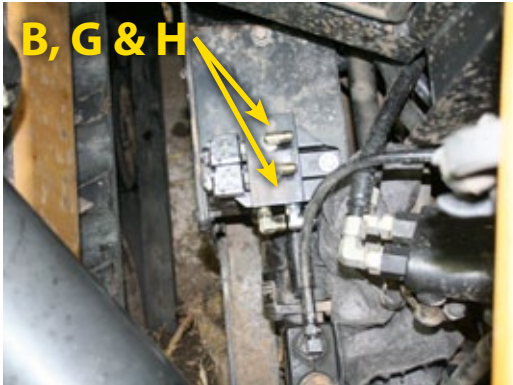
Install Mounting Bracket for FieldPilot Valve
